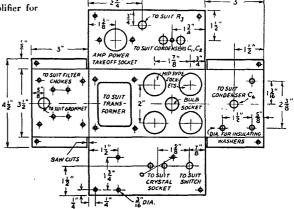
Chassis dimensions for the "Tom Thumb" transmitter-receiver showing the location of the various components.
